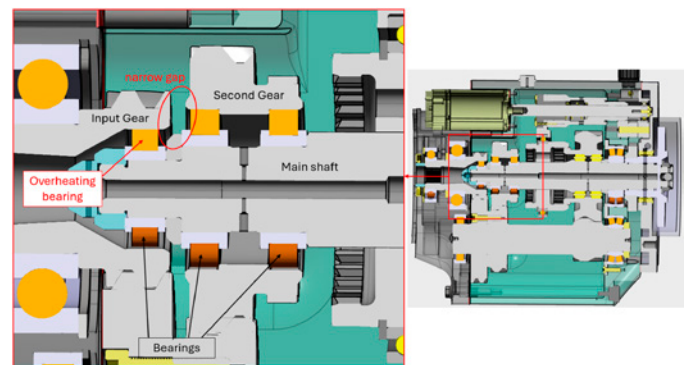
Cutaway view of the gearbox, zoomed on the narrow gap region.
